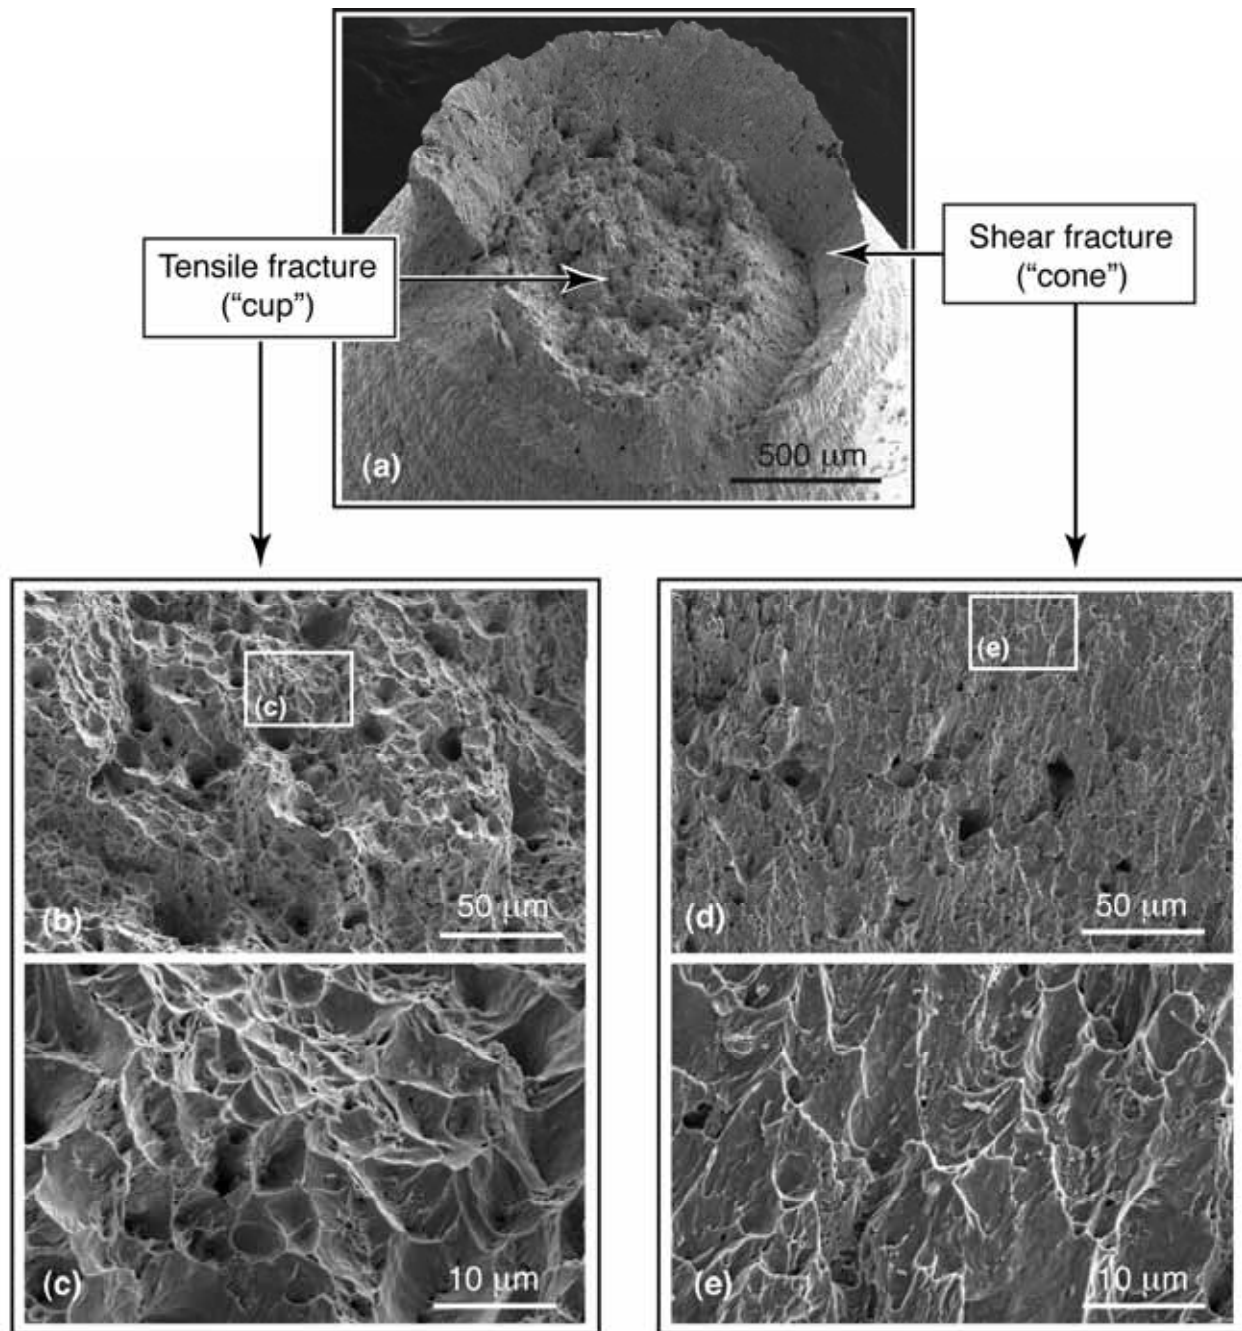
Fracture surface of DH-36 tensile bar showing: (a) cup-cone failure mode; (b, c) equiaxed dimples caused by void growth and coalescence in the central region; and (c, d) elongated dimples formed by void coalescence during shear lip formation.
